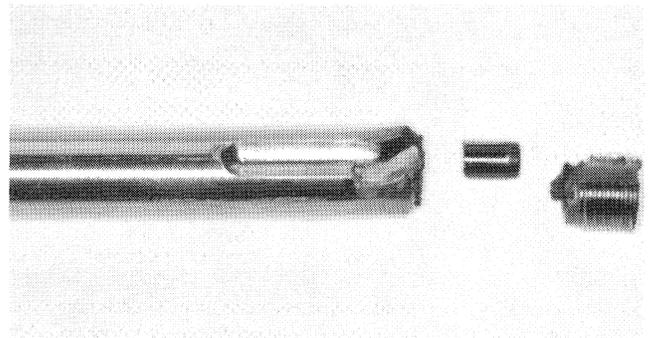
Insufficient Tightening of the End Fastener Resulted in a Loose Impeller in this Torsional Overload Failure.
